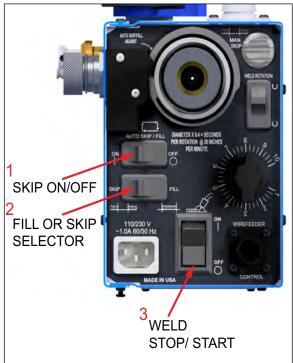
BW2600 SKIP OR FILL CONTROLS
